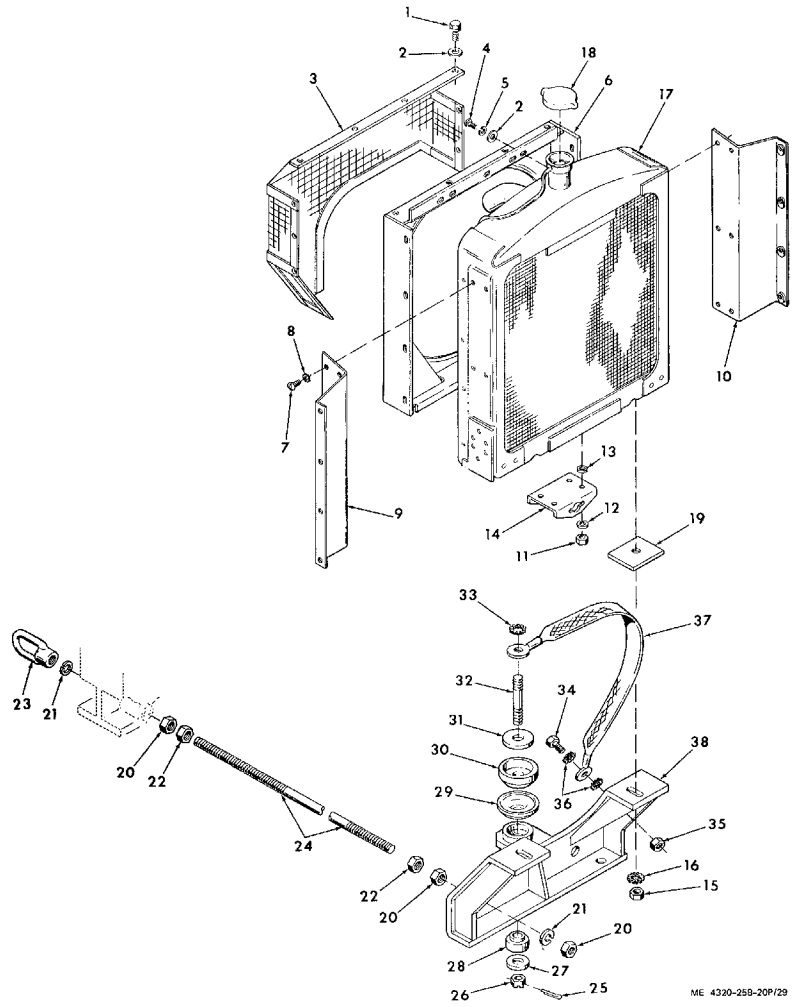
RADIATOR AND ENGINE SUPPORT
